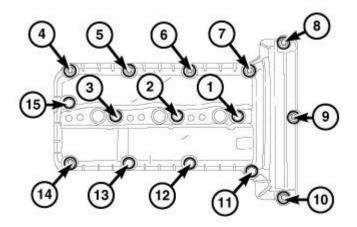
Cylinder Head Cover Bolt Tightening Sequence - Right Courtesy of CHRYSLER GROUP, LLC
